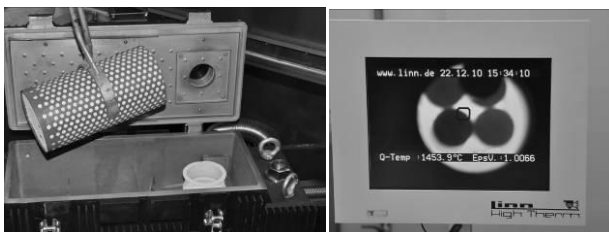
Successive stages of the casting process. Charge loaded to the furnace chamber and titanium melting process monitoring
